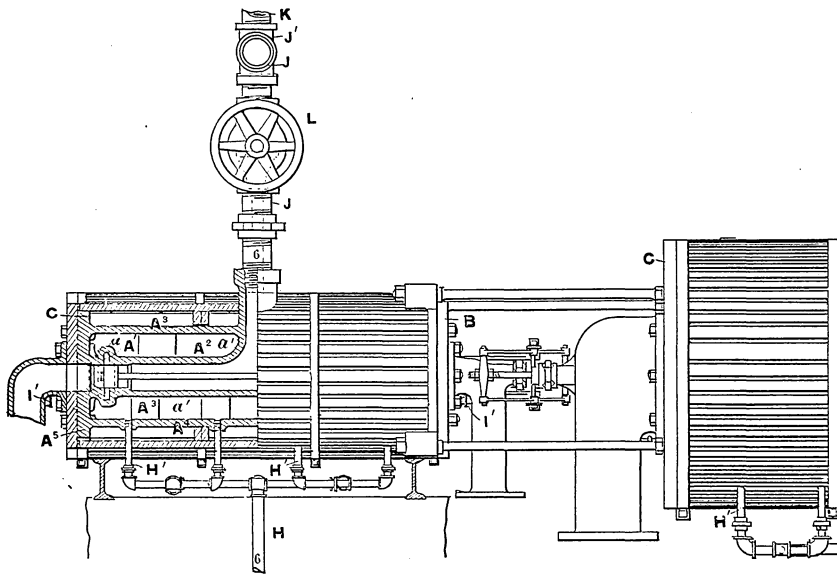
Sectional Elevation High Pressure Cylinder.
